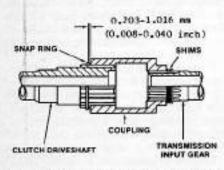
View showing proper space of 0.203-1.016 mm (0.008-0.040 inch) between snap ring and coupler. Add or subtract shims until correct.
